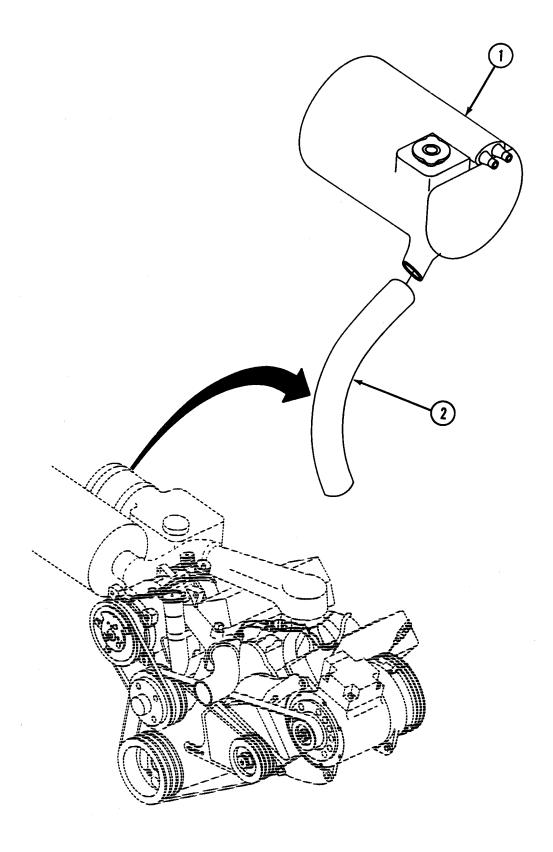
EES Kit, Surge Tank Assembly and Lower Radiator Hose
